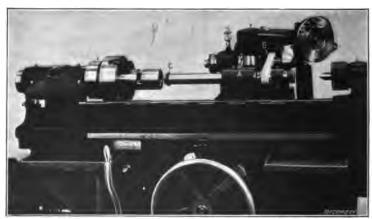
Landis Universal Grinder equipped with Internal Grinding Attachment
